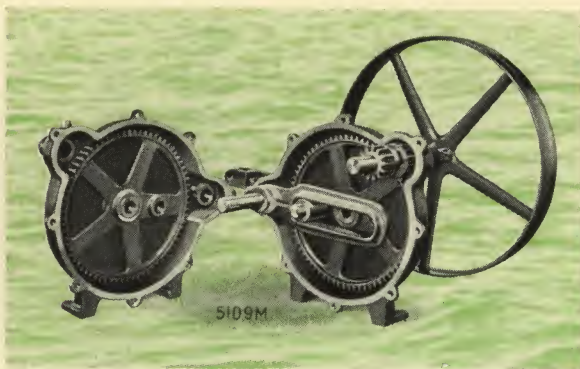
Showing the double gear drive and interior mechanism of the F-M Model "A" Self-oiling Pump Jack.
